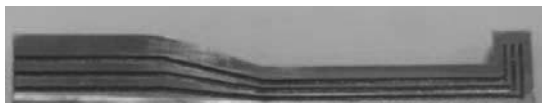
Cut through a laser sintered probe head with integrated pressure channels
